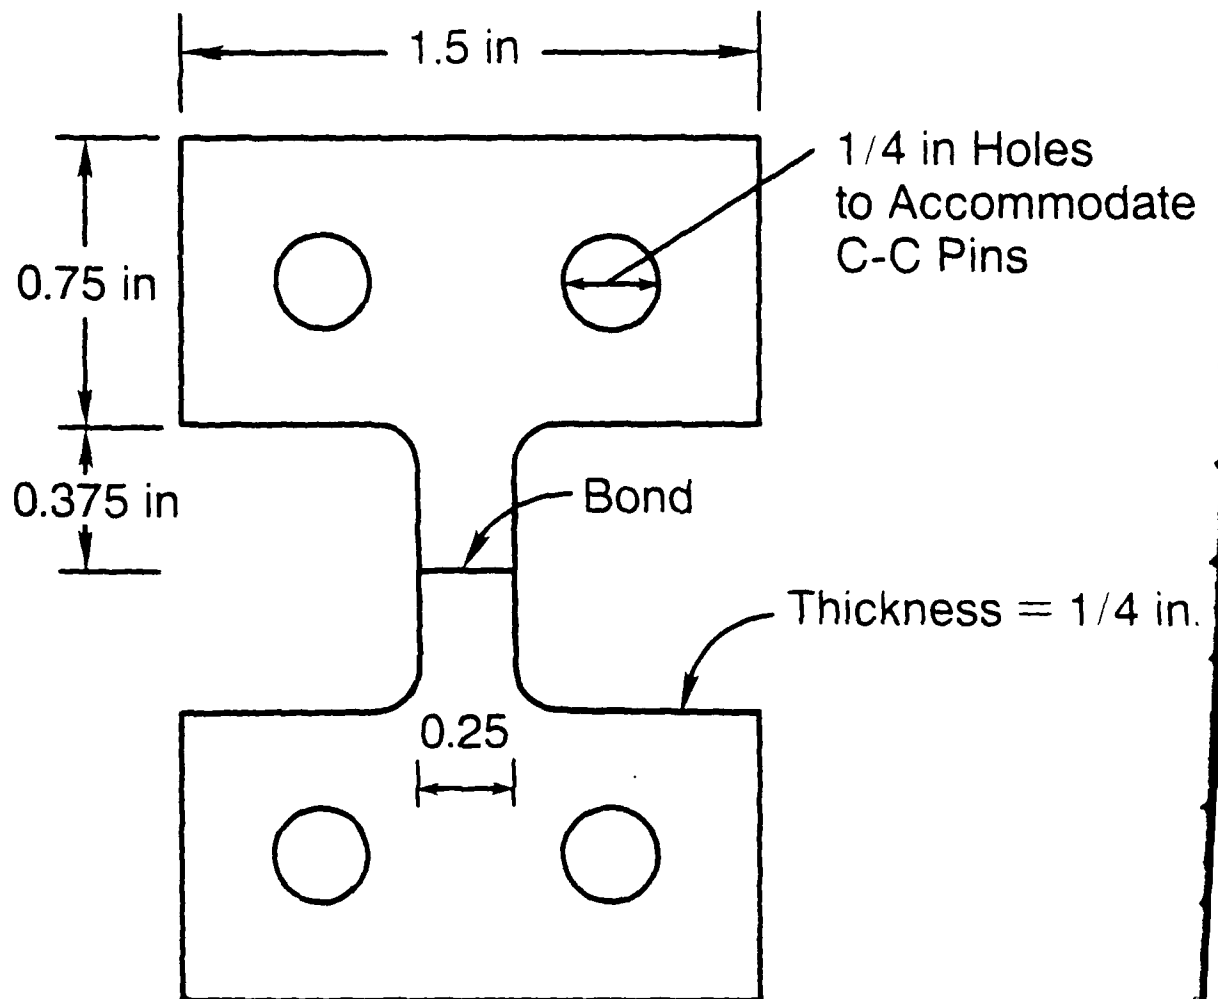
GEOMETRY OF TENSION SPECIMENS
